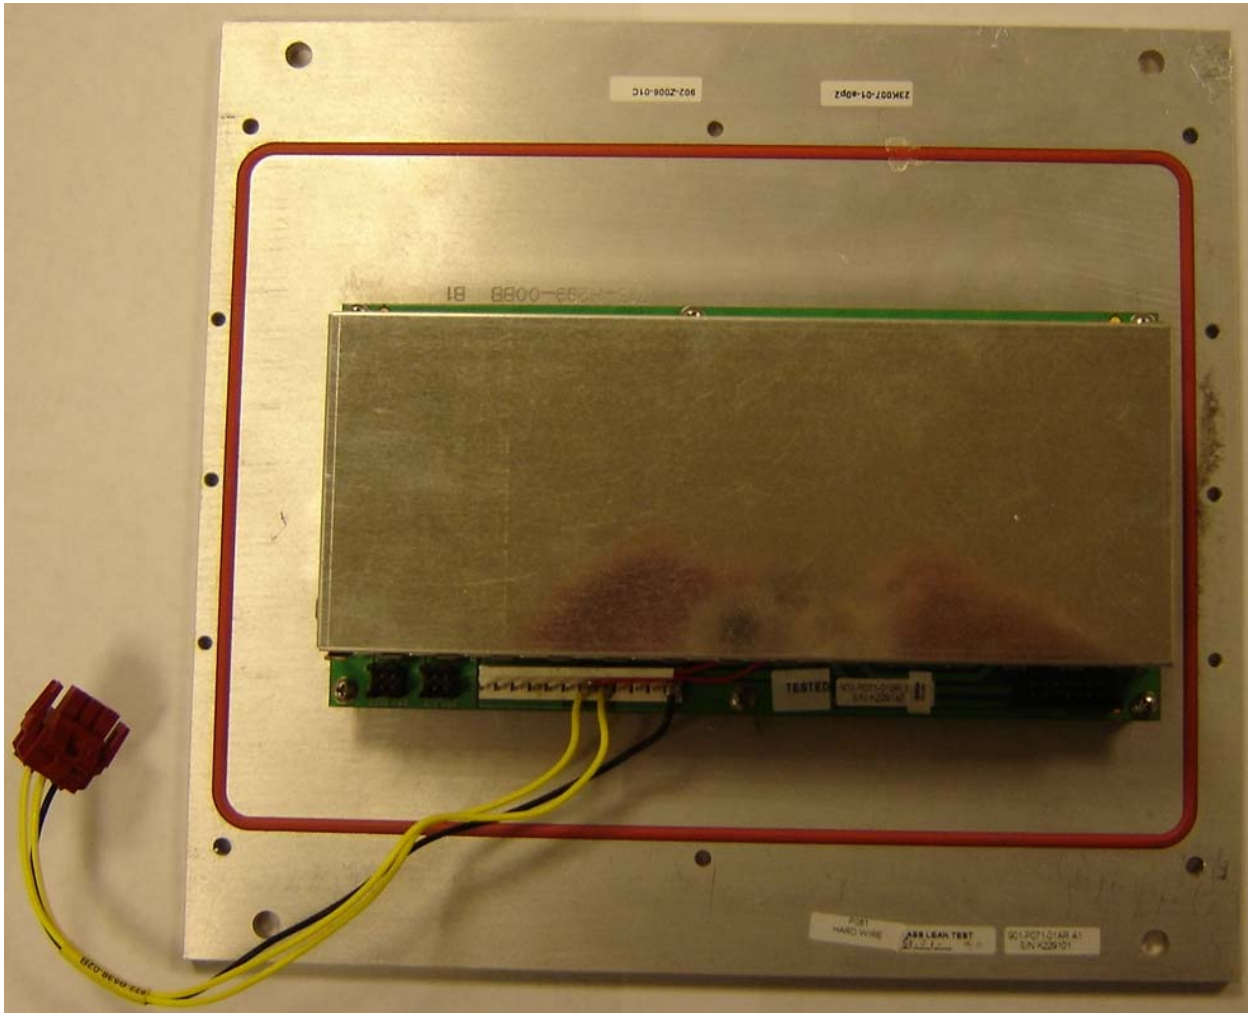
Power Supply Assembly 901-P071-01A on Upper Cover
